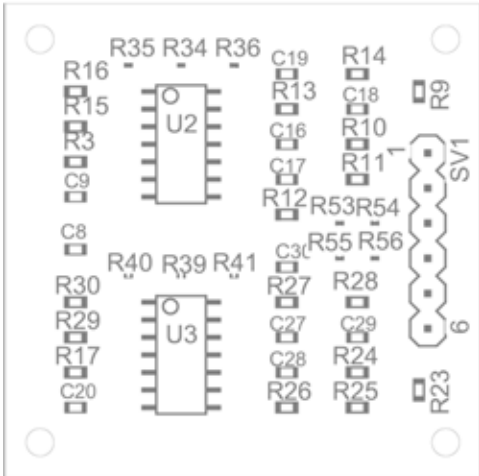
Zoomed view (200%) of the sensor board PCB top component placement.
